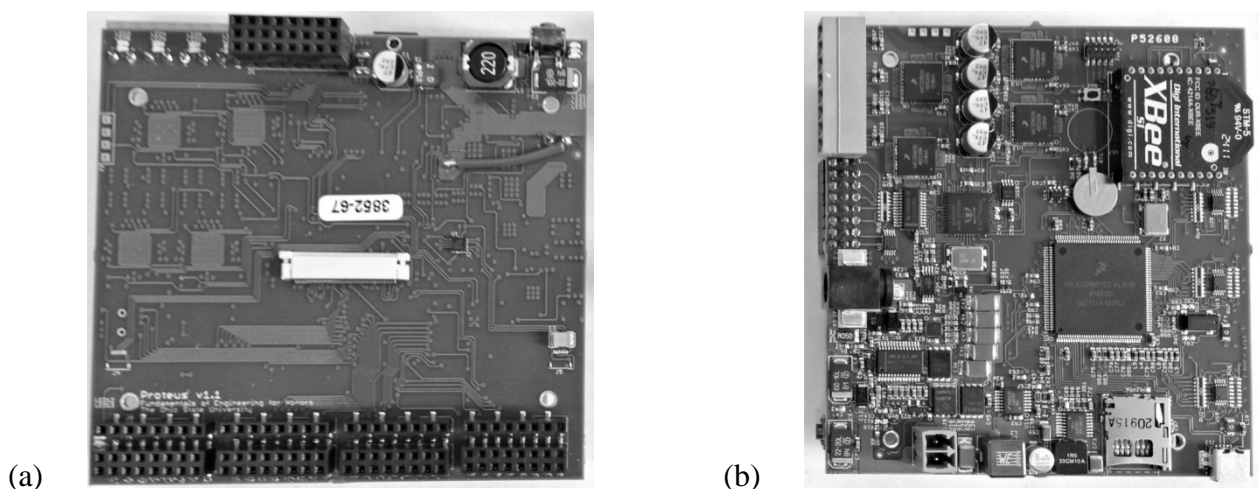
(a) Front side of Proteus PCB, and (b) Back side of Proteus PCB.
